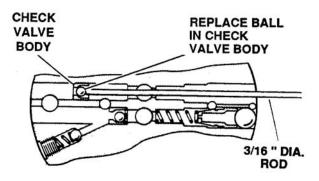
Driving Check Valve Body and Ball From Pintle Housing
